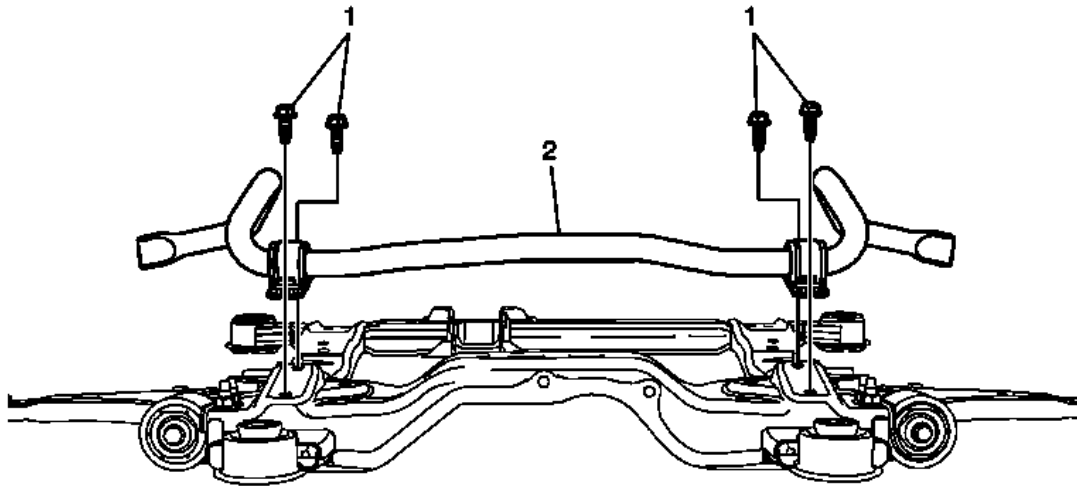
Stabilizer Shaft & Clamp Bolts (GNA, GNB)
